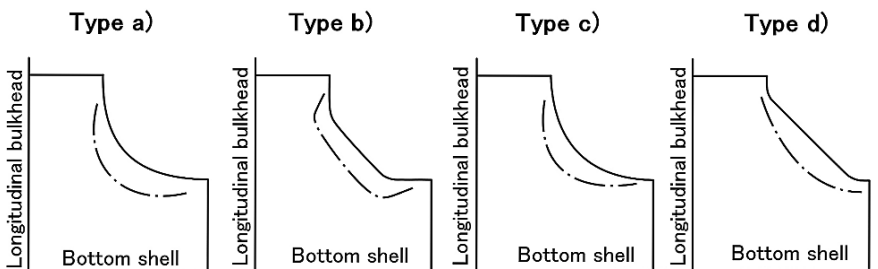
Face plate stress due to shape of bottom transverse corner in wing tank
